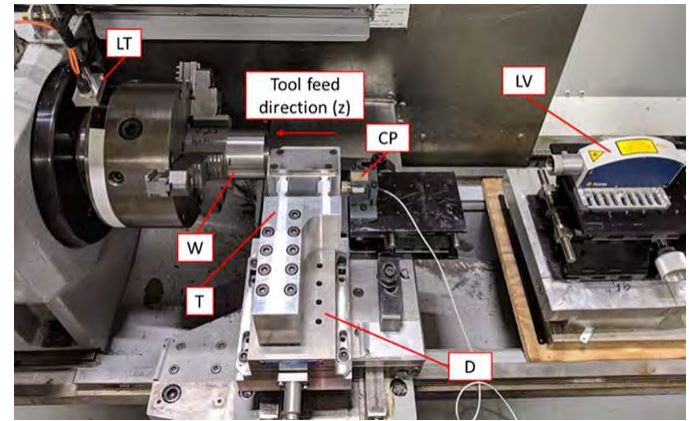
Photograph of tube turning setup including workpiece (W), dynamometer (D), flexure-based cutting tool (T), laser tachometer (LT), laser vibrometer (LV), and capacitance probe (CP).
